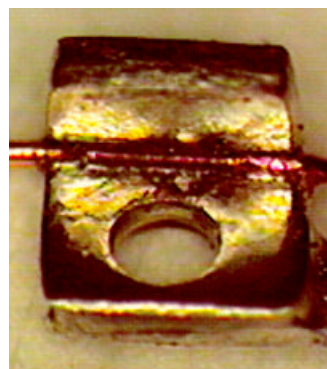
Complete prototype electronic contact with FlashSoldered polyurethane-nylon magnet wire.
